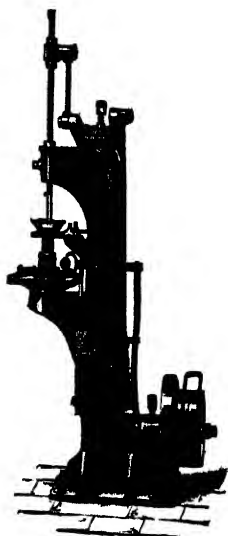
Single Stroke Tea Packing or Parcelling Machine (perspective view).
